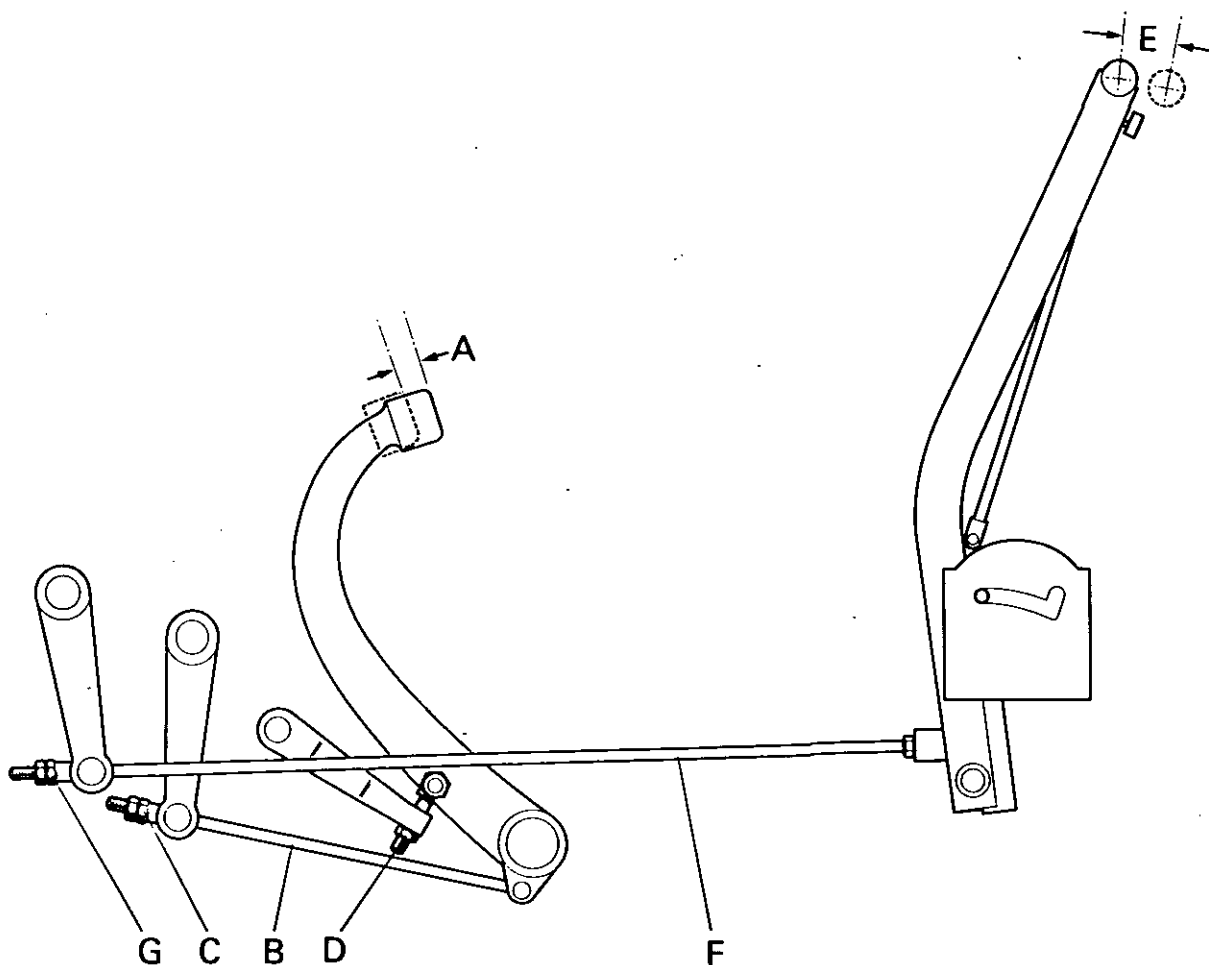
CLUTCH LINKAGE — 1200 TRACTORS
